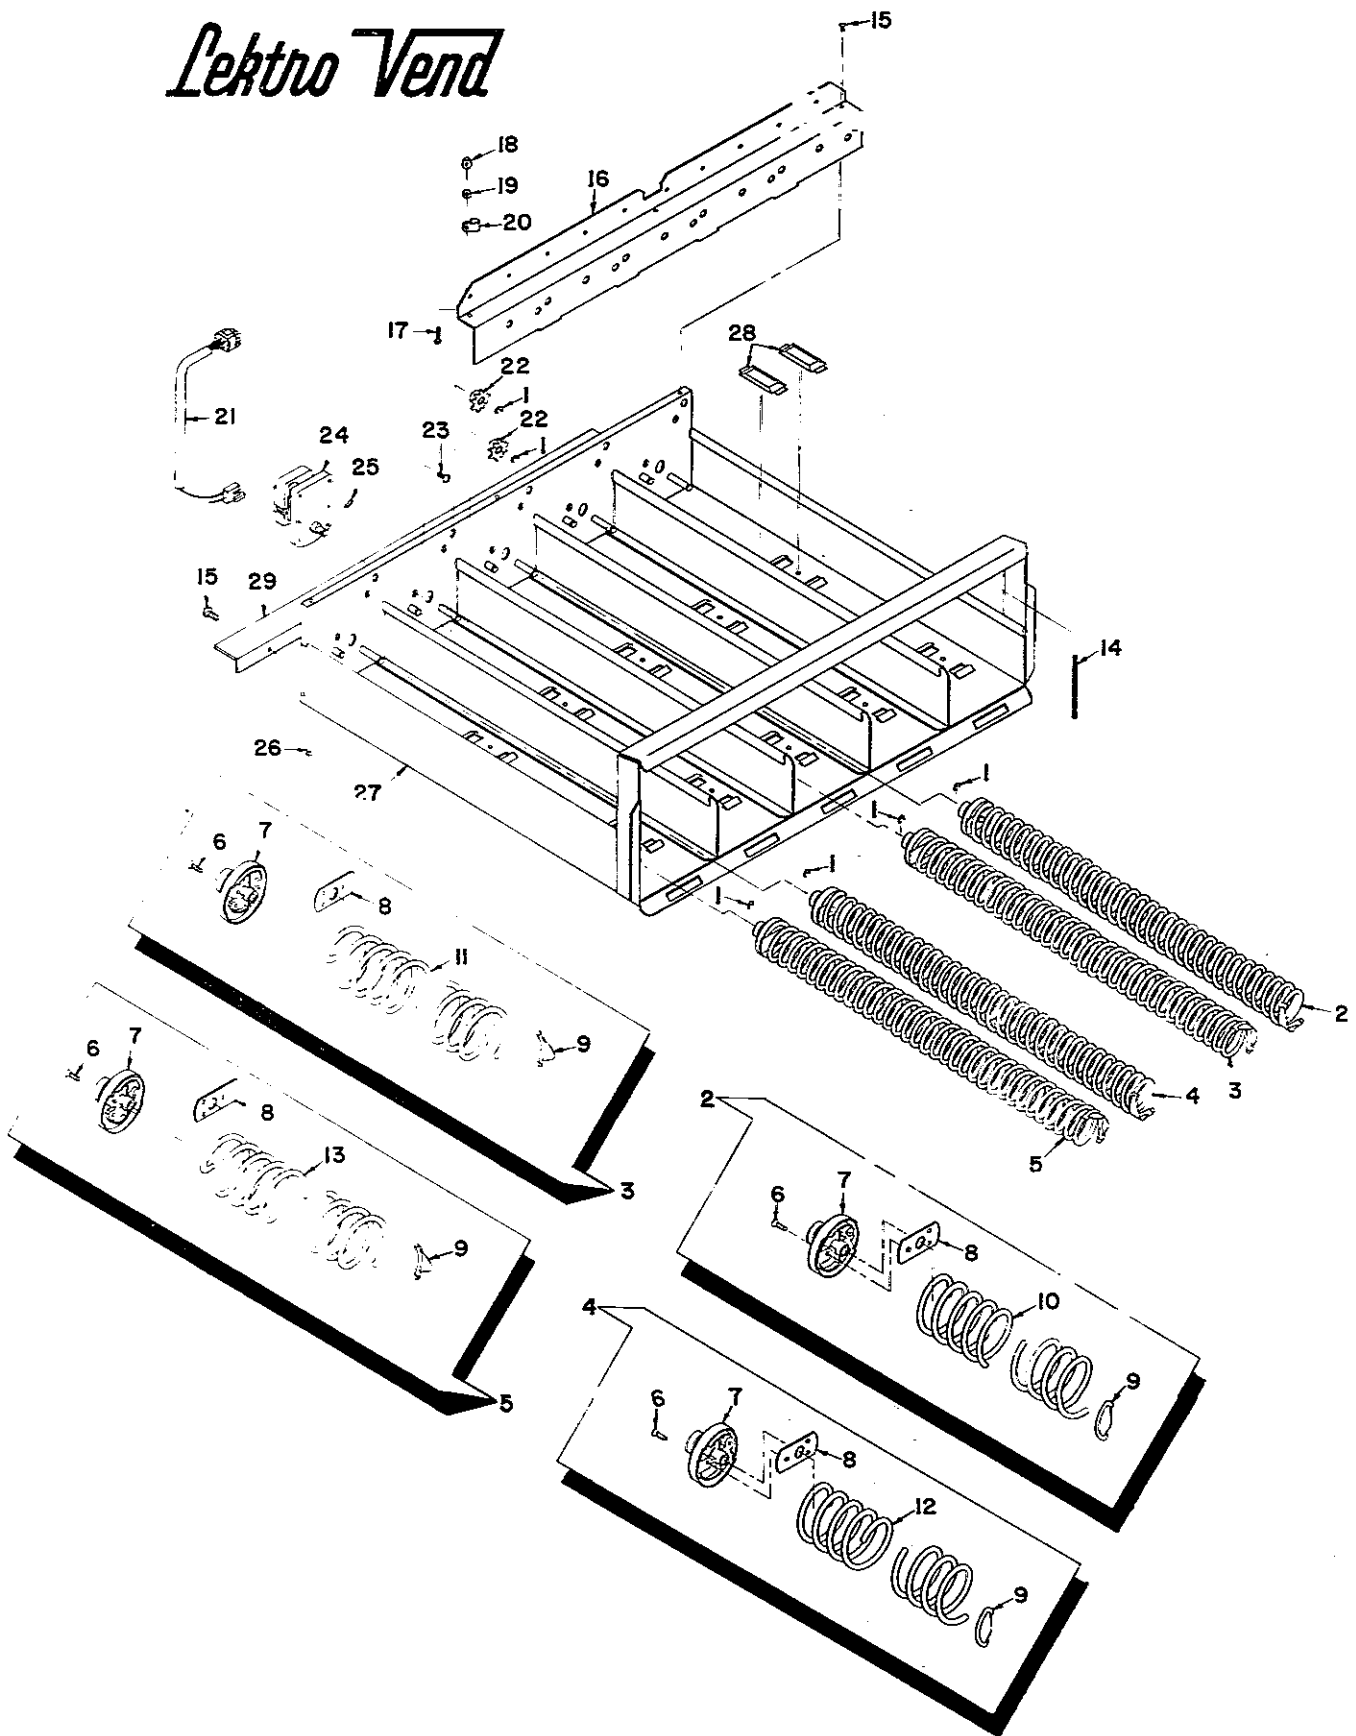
TOP TRAY ASSEMBLY COMPLETE -- 5 COLUMN
